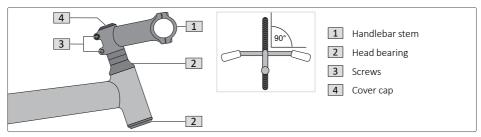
Adjusting the handlebar stem (clamping with clamping screw)
